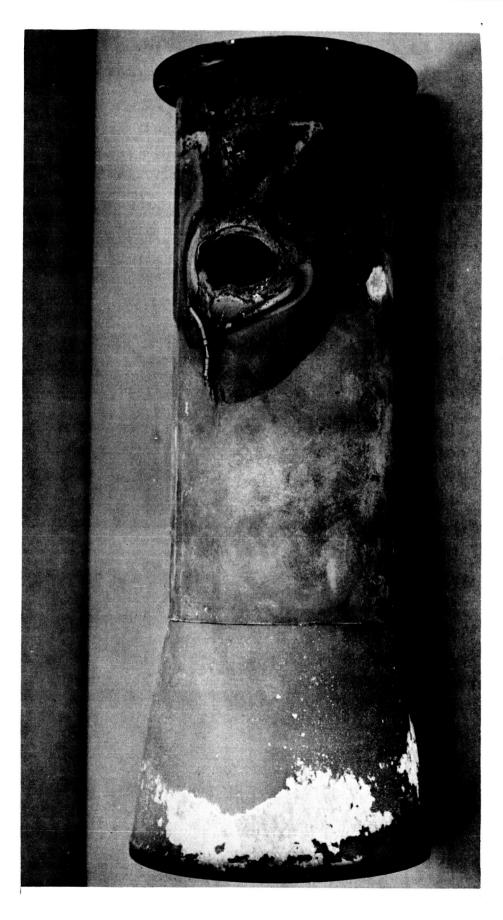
Chamber Assembly From Engine S/N 1 After Test Burnout Region
